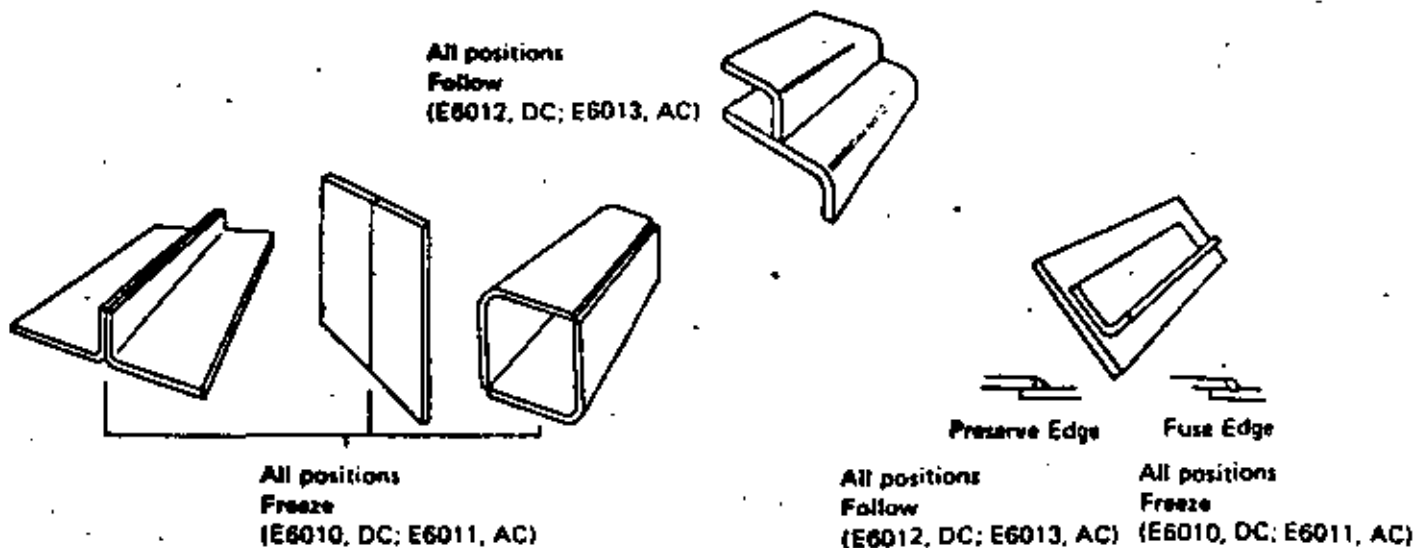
Guide to selection of electrodes for sheet metal welds.
